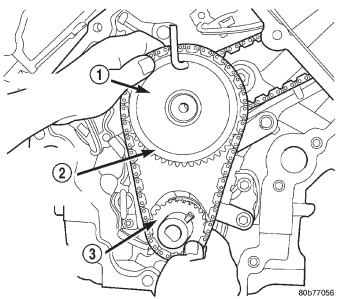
Installing Idler Gear, Primary and Secondary Timing Chains
